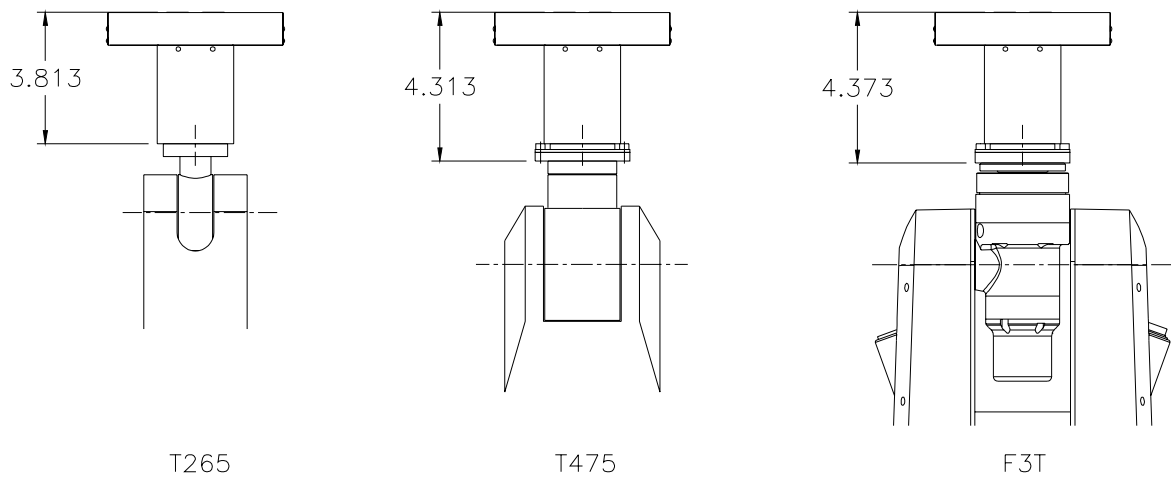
Offset values from robot tool flange to servo gripper finger mounting surface.
